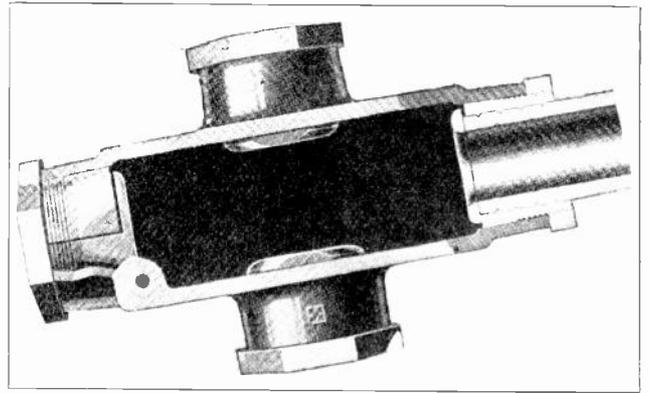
Sectional view of a fitting for threadless conduit, showing the special gripping sleeves inside its ends.
